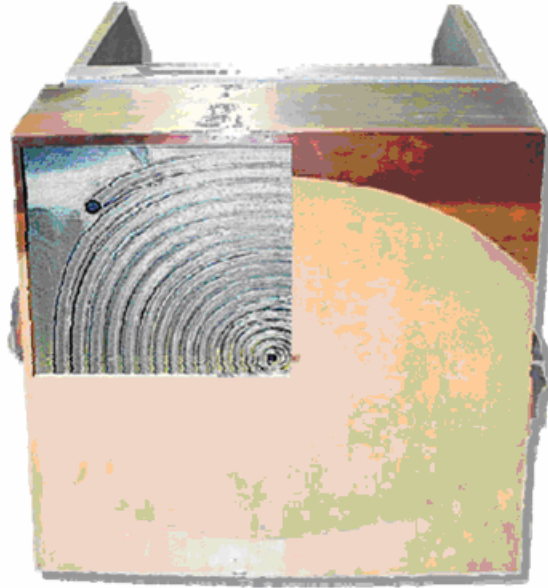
Single beam mirror with the Cu-SS sandwich structure. The copper surface is partly removed to show the cooling channel spiral.
